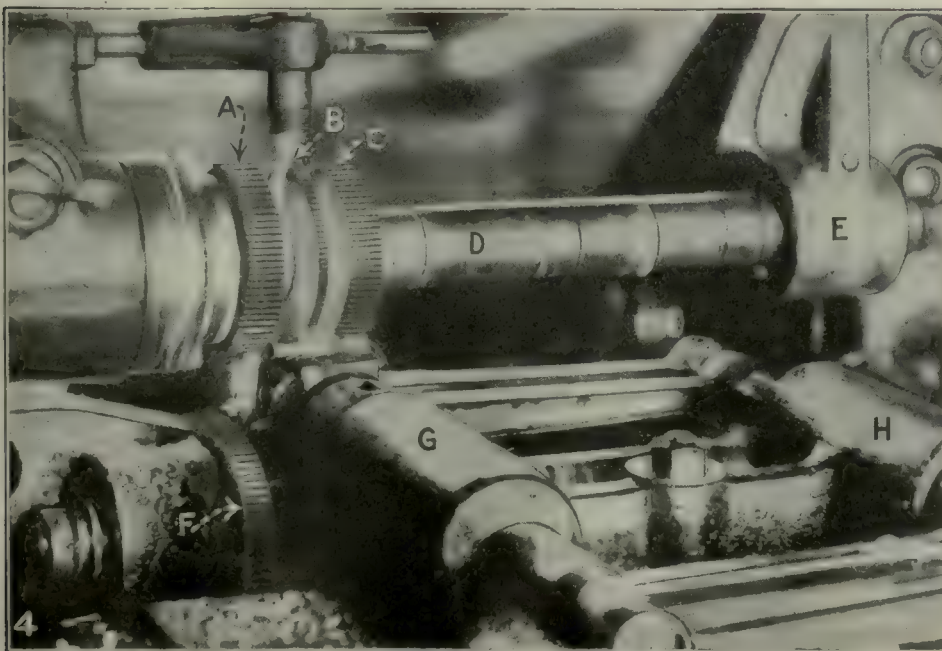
DOUBLE FIXTURE FOR MILLING BOLT BOSSES AND CUTTING OFF CAPS
